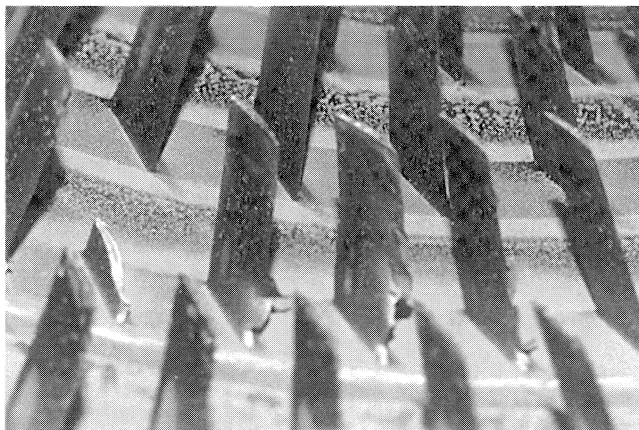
Damage Caused Due to Clash Failure. (Stator fatigue failure can also be seen.)
